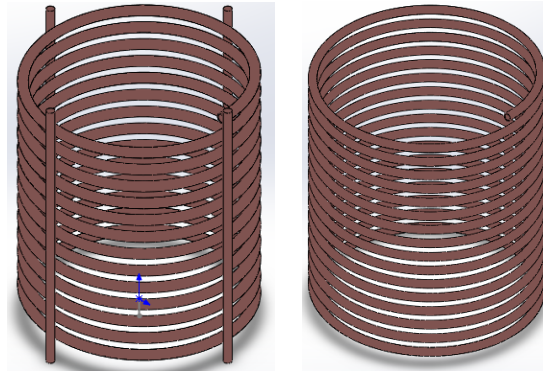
Helical Evaporator (a); Helical Condenser (b)
